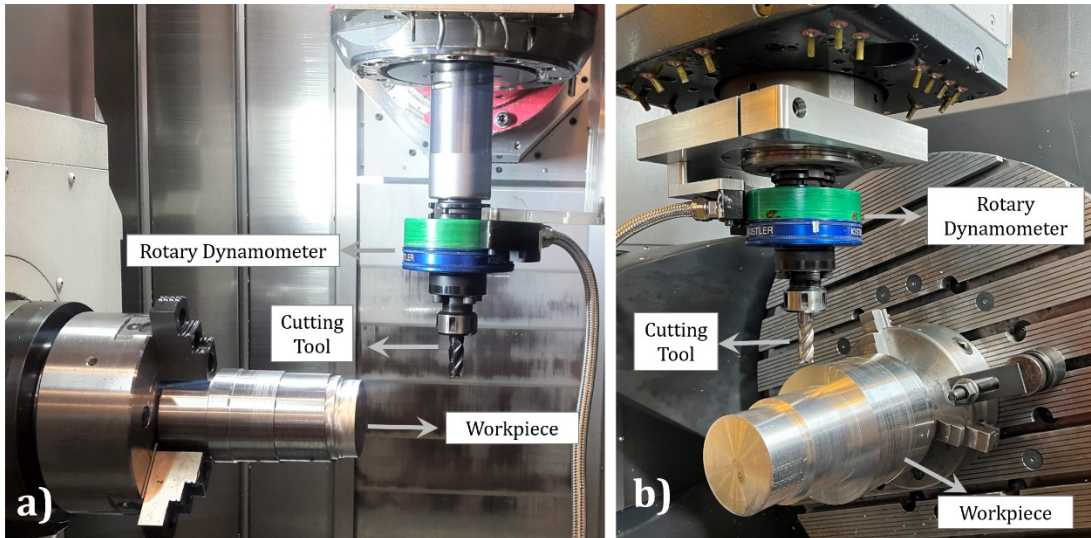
Experimental setup for cutting force measurement in orthogonal turn-milling
